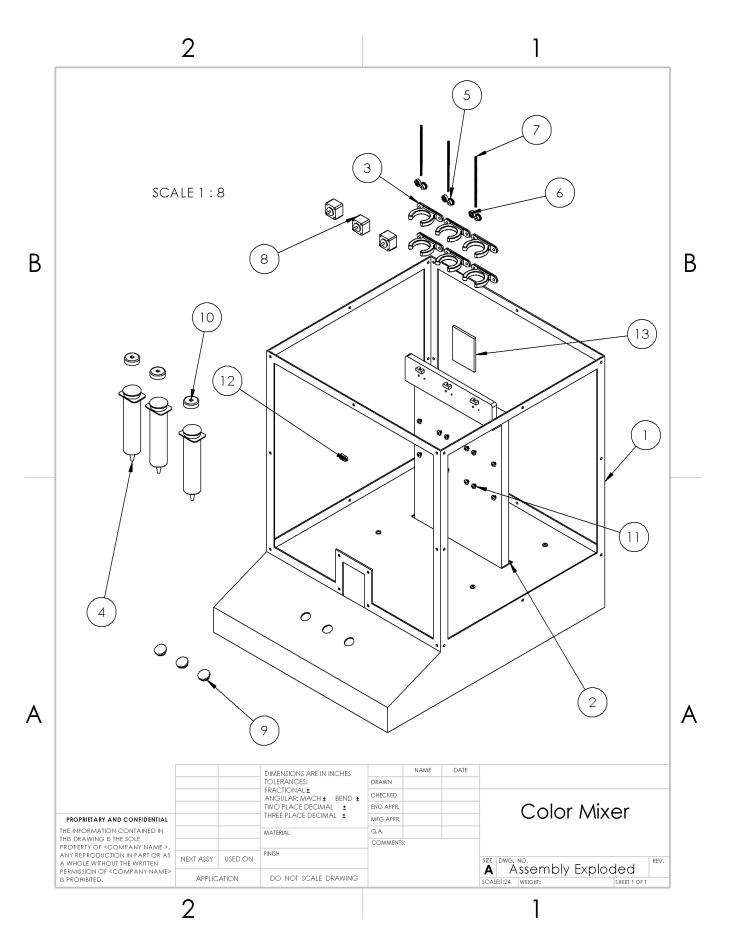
Color Mixer CAD embodiment exploded view with balloons
